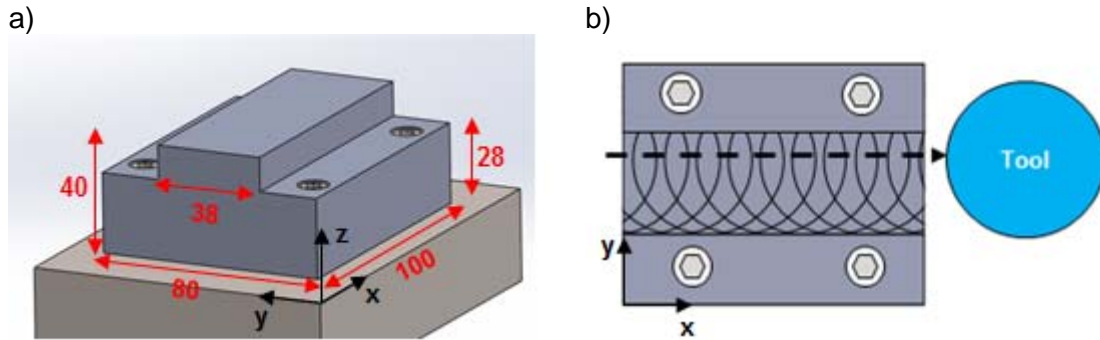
a) Geometry and dimensions (in mm) of the specimen used in the face milling experiment, and b) schematic representation of the tool path (upper view) during the face milling
